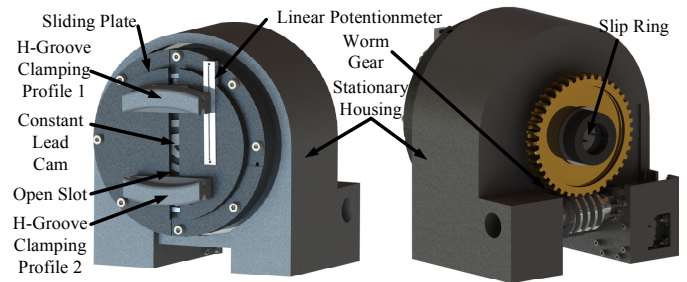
Mechanical design of GHEFT. Left: front view, Right: rear view
